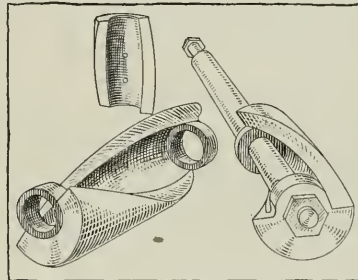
HELICAL GUIDES FOR CUTTER SPINDLES IN THE SYKES DOUBLE HELICAL-GEAR GENERATOR
